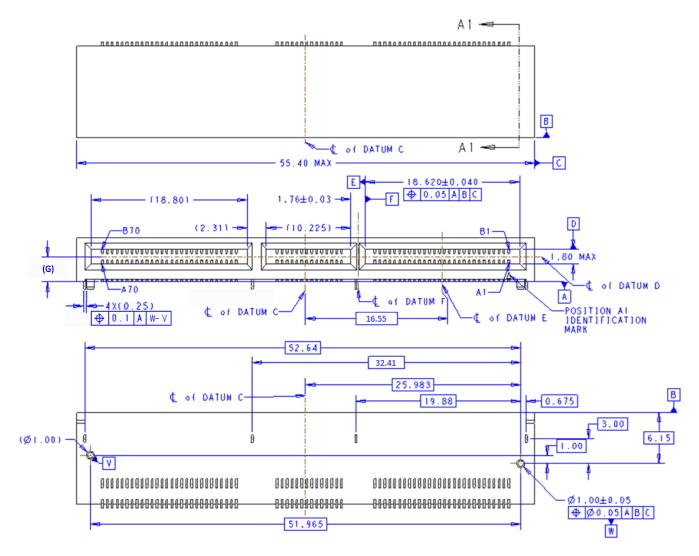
4C RIGHT ANGLE CONNECTOR DIMENSIONS
